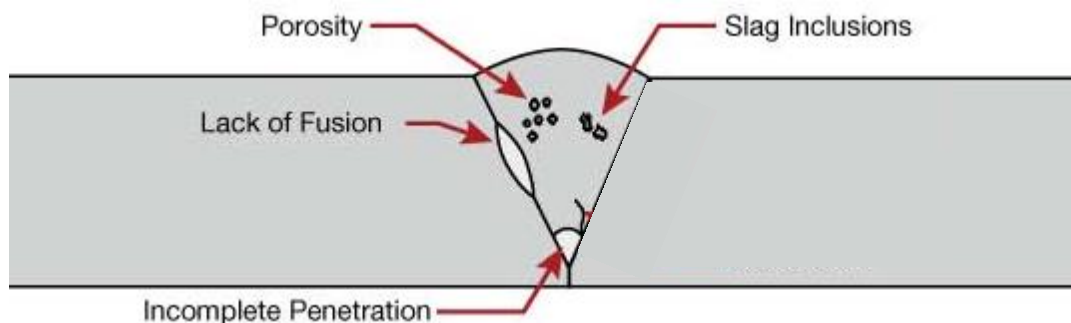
Welding defects, lack of fusion, incomplete penetration
